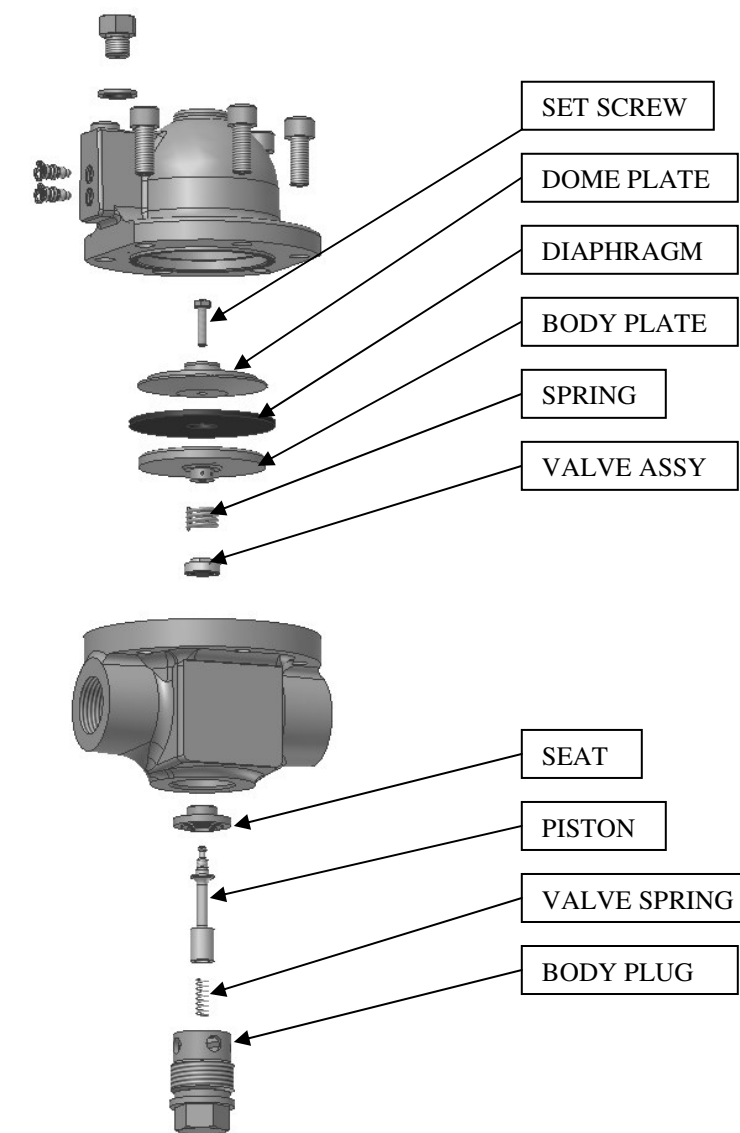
Valve Dis-assembly ('o' rings not shown)
